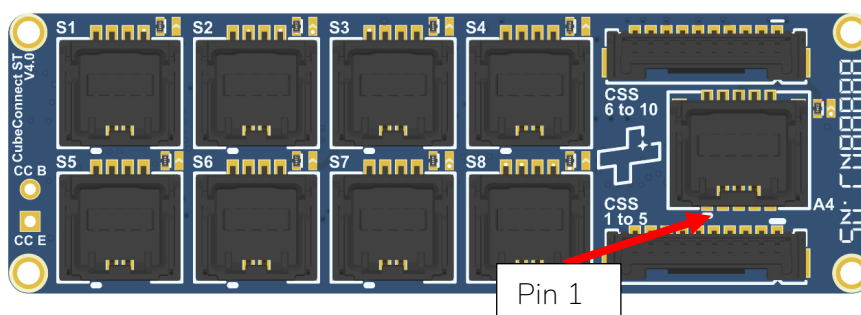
CubeConnect PCB - CubeWheel 4 Header
